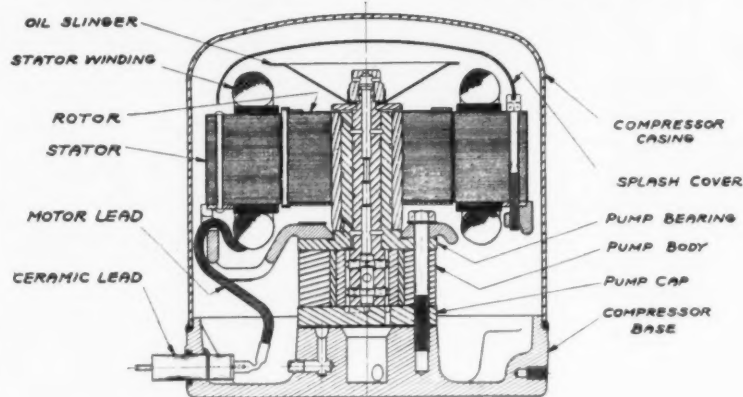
Vertical section of a Majestic hermetic rotary type compressor.
